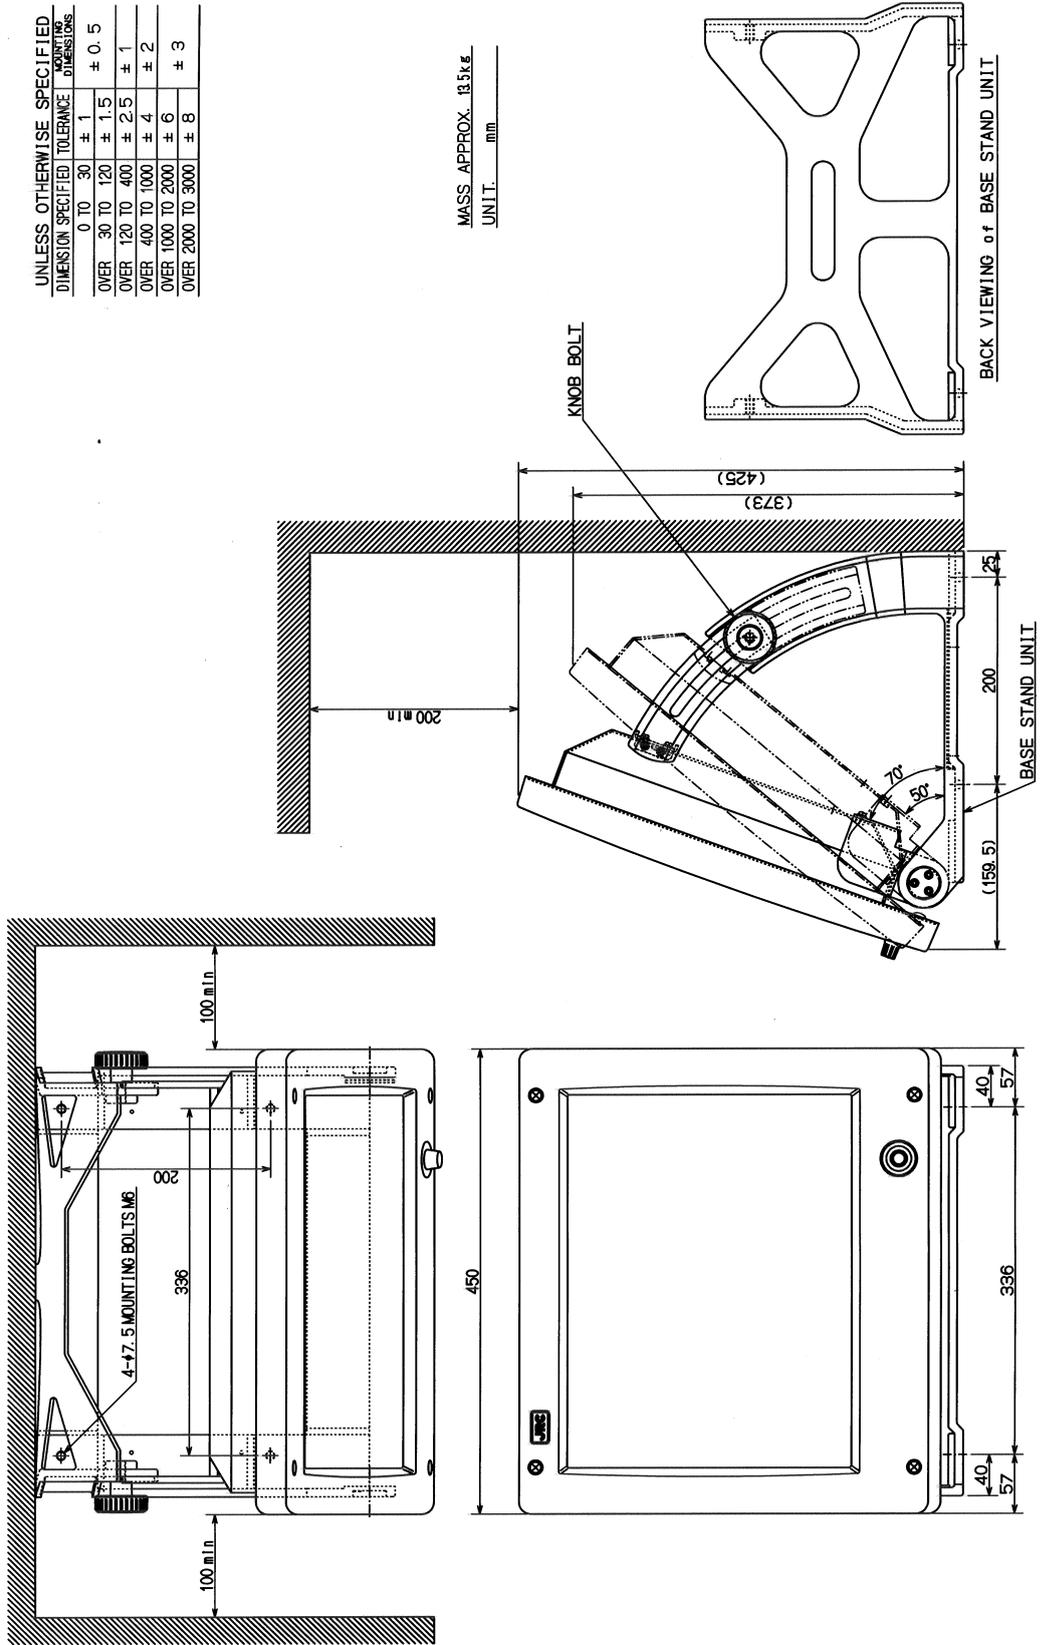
Exterior Drawing of Display Unit, Type NWZ-147
